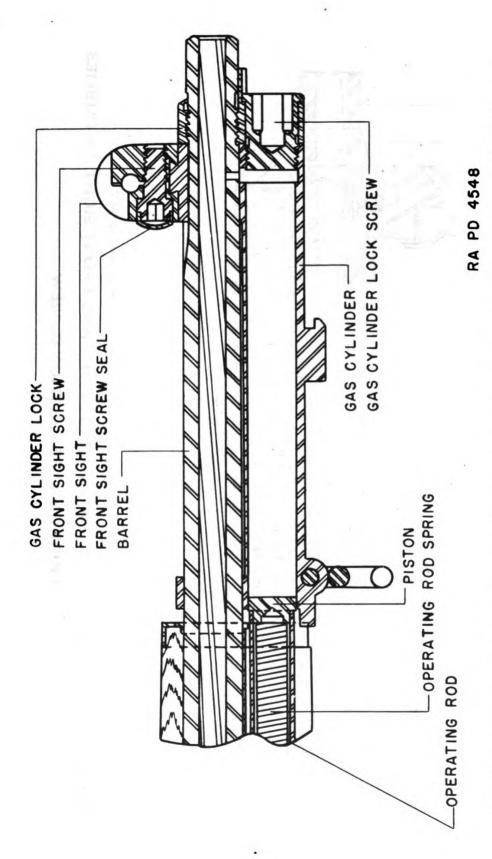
U.S. RIFLE, CAL..30, M1 - GAS CYLINDER AND FRONT SIGHT ASSEMBLIES SPLINE TYPE - OPERATING ROD RETRACTED - SECTIONAL VIEW
